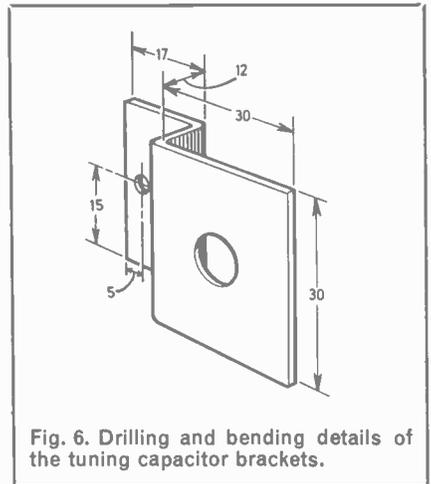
Drilling and bending details of the tuning capacitor brackets.
